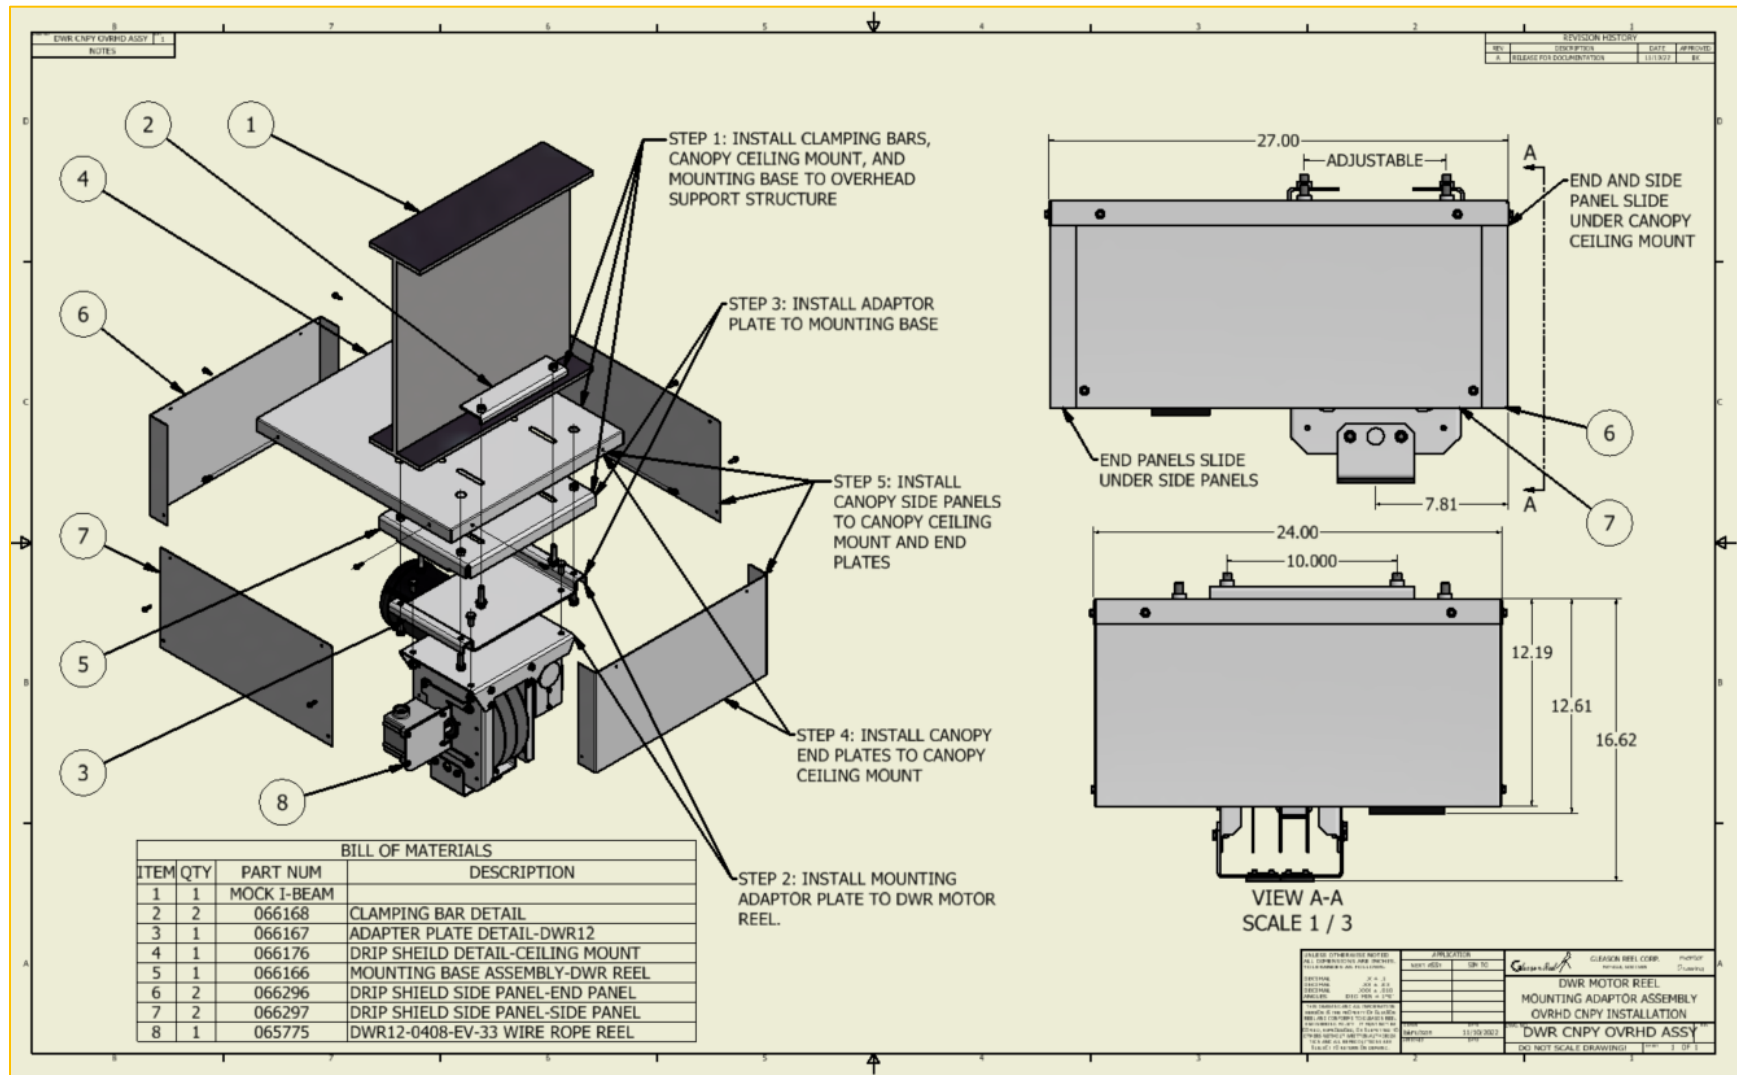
Overhead Mounting with Mounting Adaptor Assembly and Canopy
